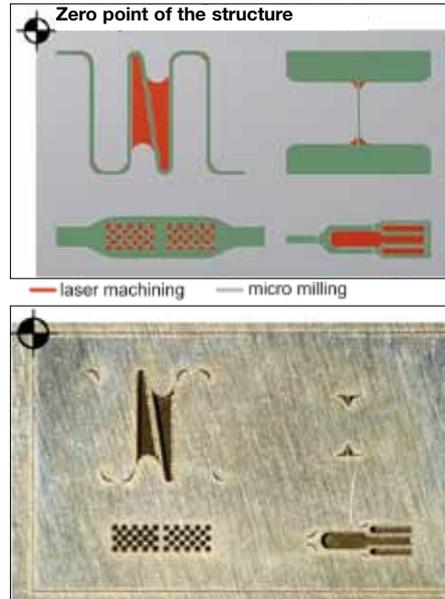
Zero point detection for laser machining and micro milling: (top) arrangement of test piece (bottom) Workpiece after the first process step, laser ablation.
